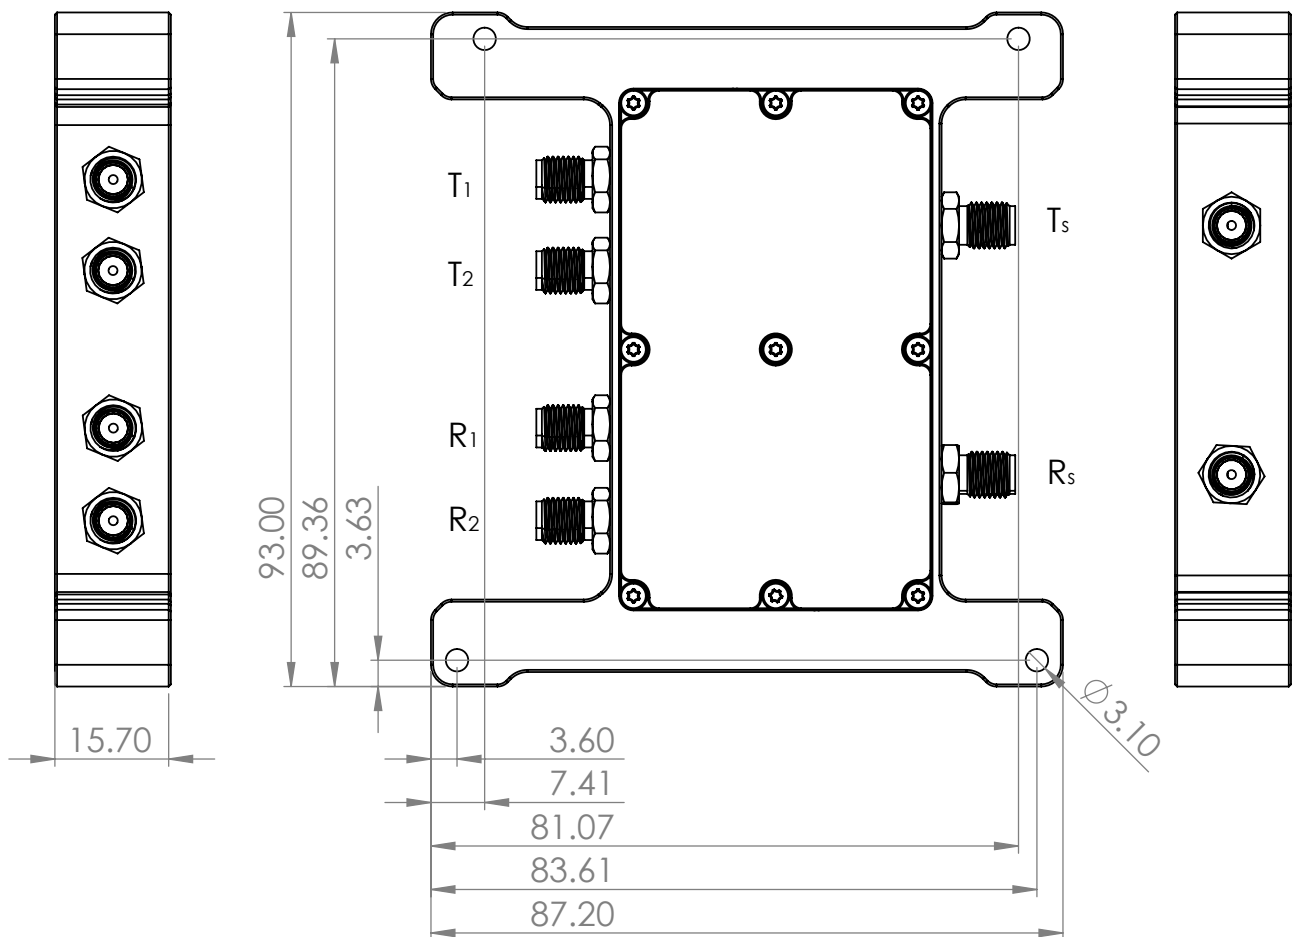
Board outline and side views showing the X+, X-, and Z+ faces. All dimensions in mm and ± 0.1 mm tolerance.
